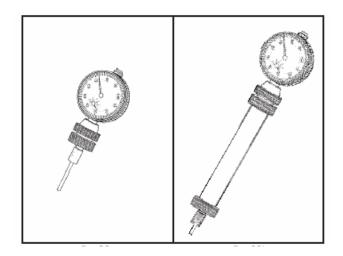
Fig - 6FIP rear end dummy plug sizes are M8 and M10. Use special tool part no.
